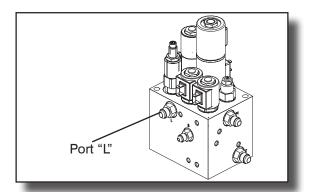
Lift Cylinder Hydraulic Hose Installation
